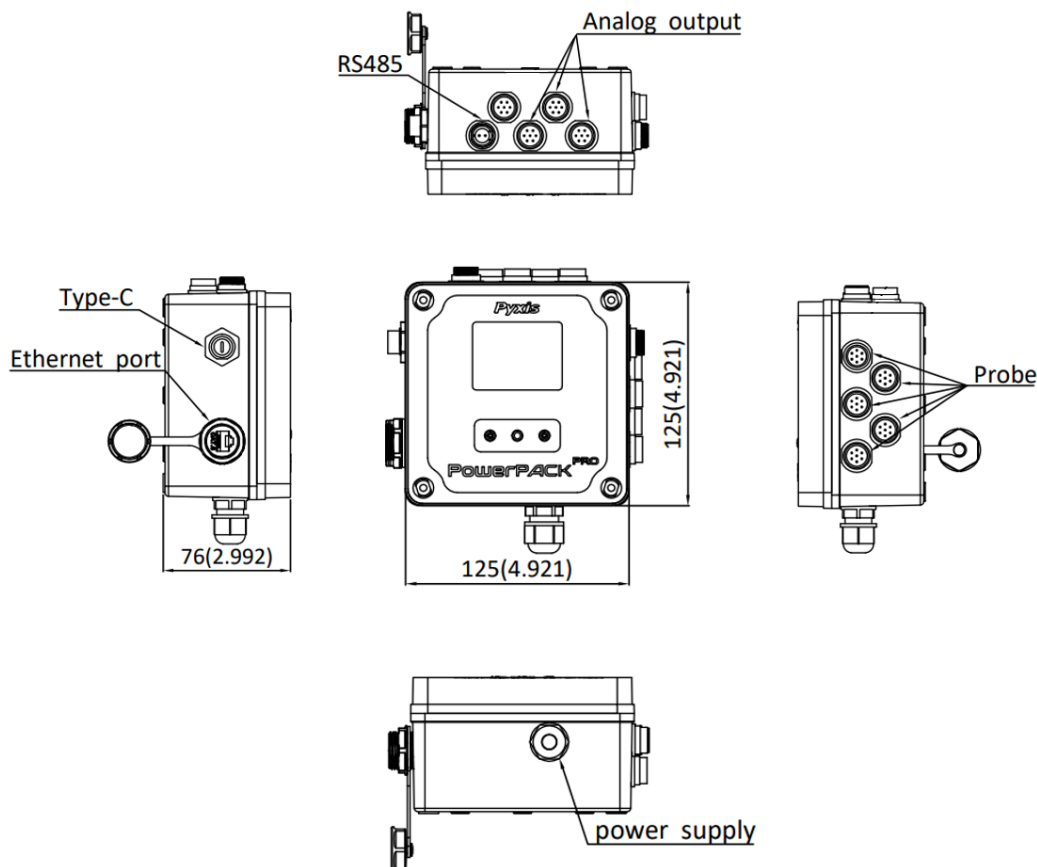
PowerPACK Pro-5 Dimension -mm(inch)
